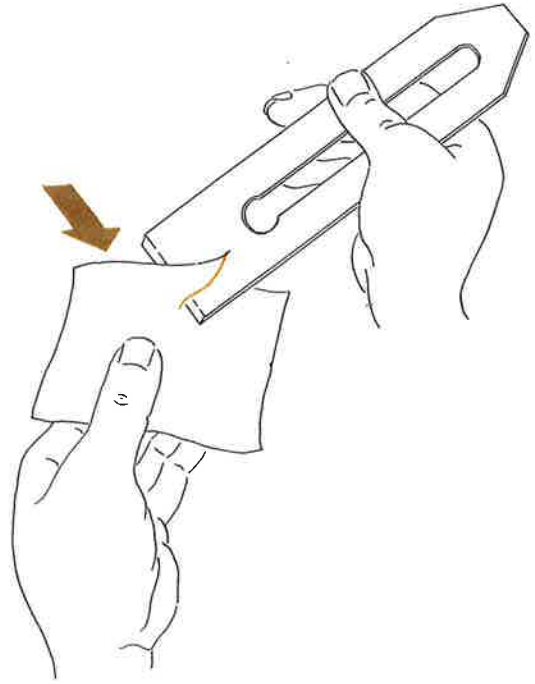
Testing the cutting edge on a piece of paper to determine the sharpness of a plane iron.
